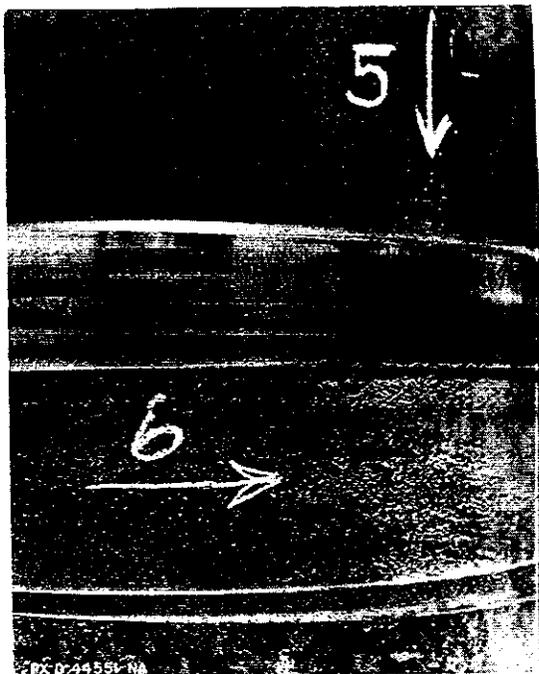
Girishk Powerplant Unit 1. Turbine shaft showing severe wear. Groove between 5 and 6 was caused by the lower packing which was missing completely at time of disassembly. Area 6 shows galling under the packing gland.
